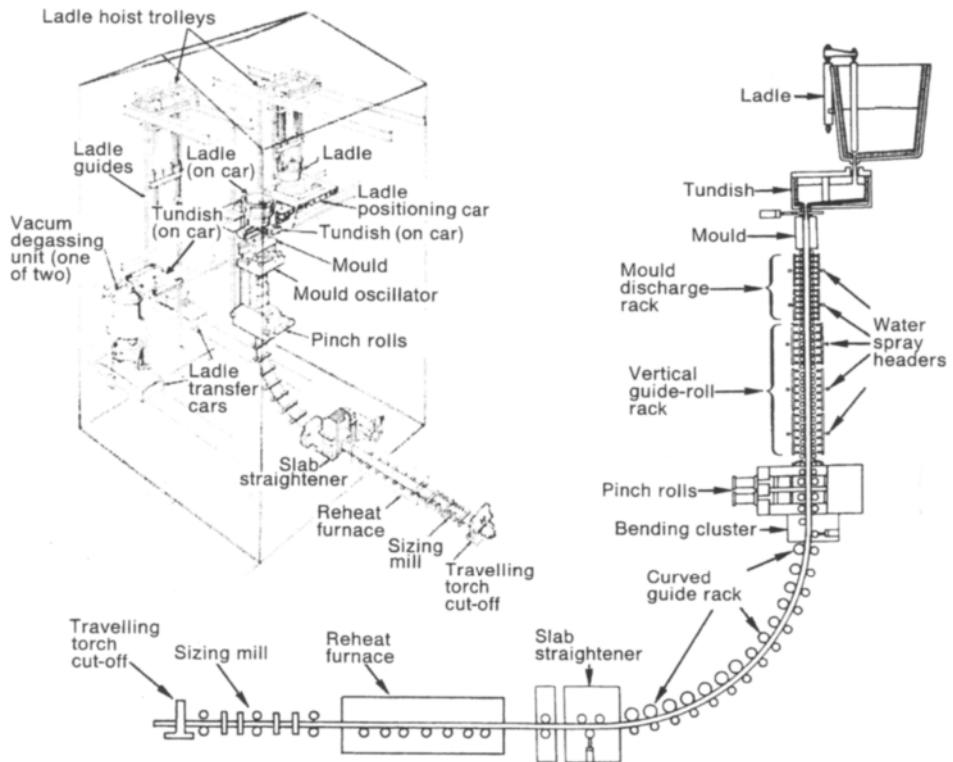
Schematic cross-section of a continuous slab caster for the production of a single slab strand. The inset shows the general arrangement of equipment in the works. (Reproduced courtesy of The AISE Steel Foundation.)
